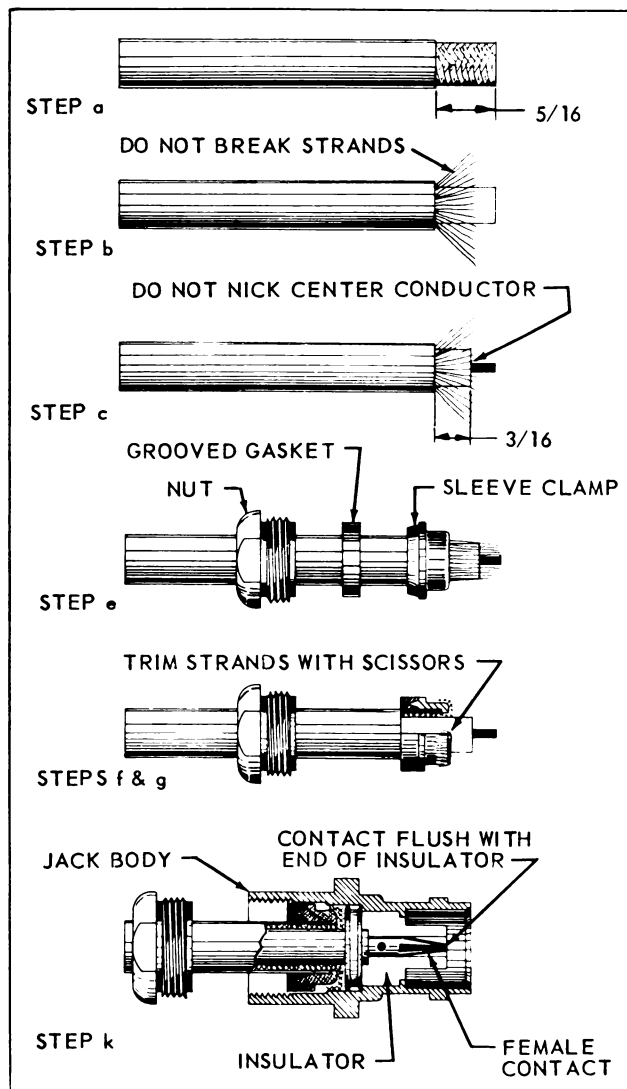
Attaching Improved BNC Connectors to Coaxial Cable
